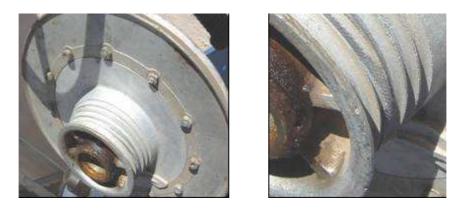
Checking for damage of groove using GO - NO -GO Gauge
